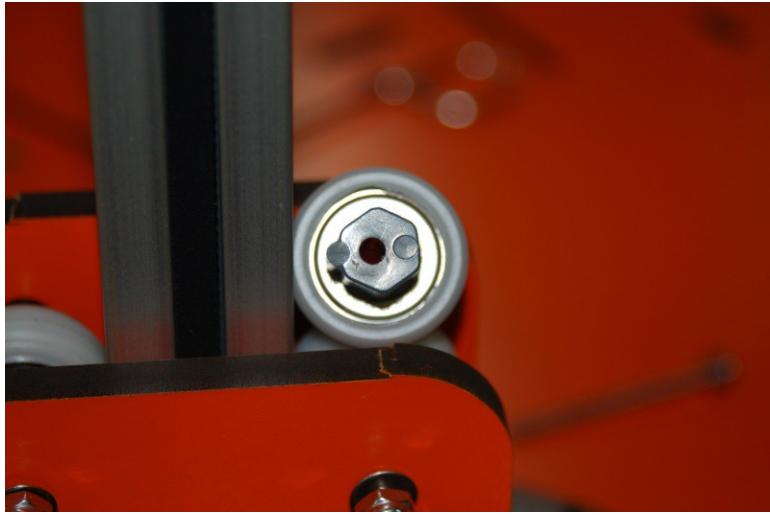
Correct orientation of the eccentric cam prior to installation.
